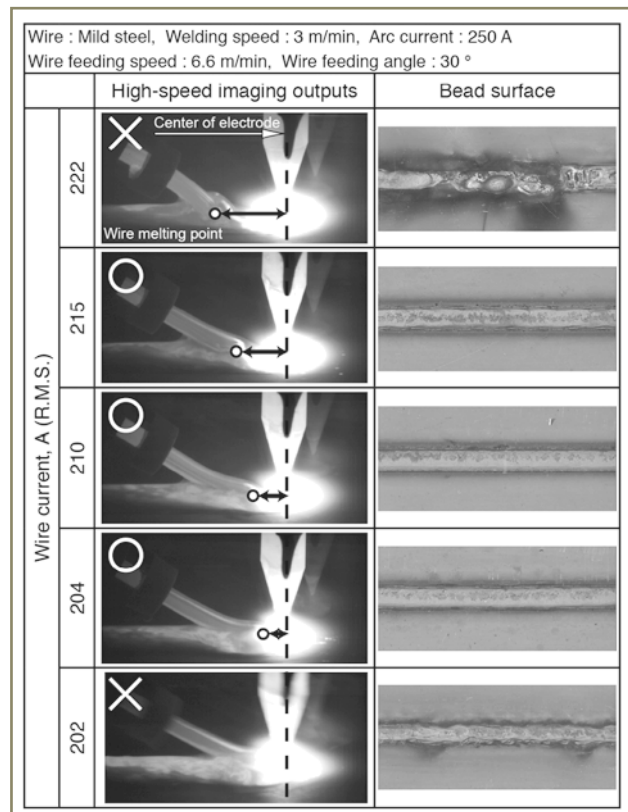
High-speed imaging outputs and bead surfaces (mild steel)
